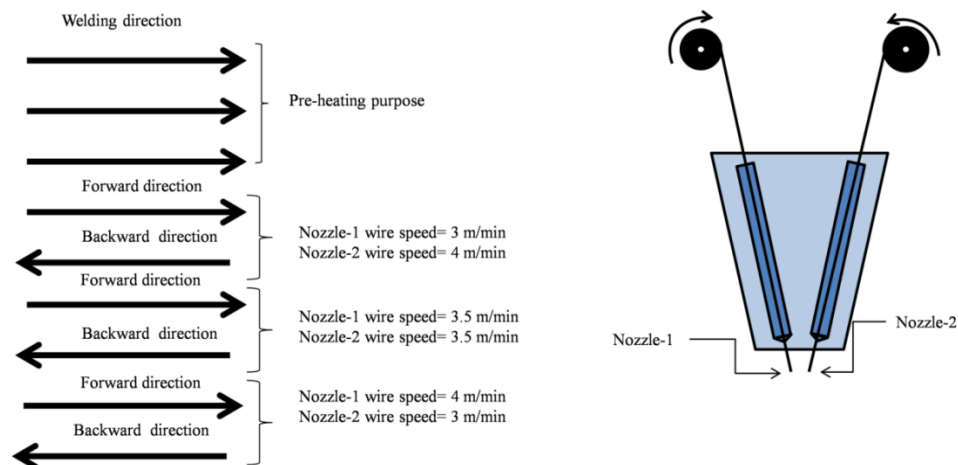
Schematic representation of weld torch direction and wire speed.
